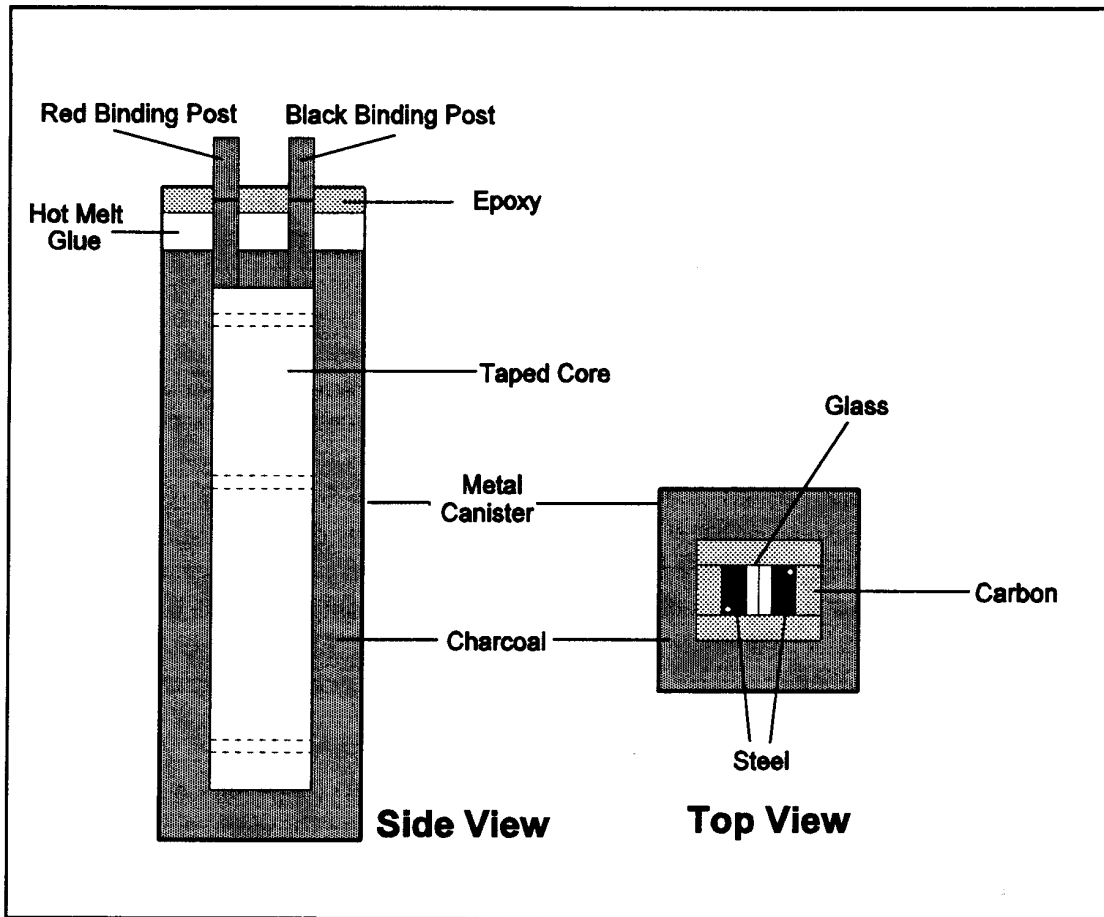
Radial Appliance assembly. Side view showing inside of assembled appliance, with core surrounded by tape to prevent contact with charcoal. Top view, showing arrangement of carbon pieces, steel, and glass – with holes drilled in steel for insertion of binding posts.
